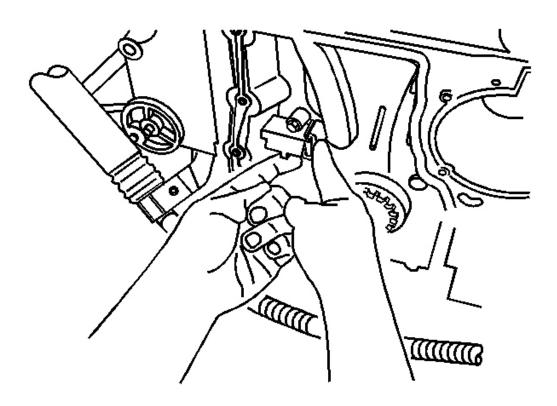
Releasing Timing Chain Tension Courtesy of GENERAL MOTORS CORP.
